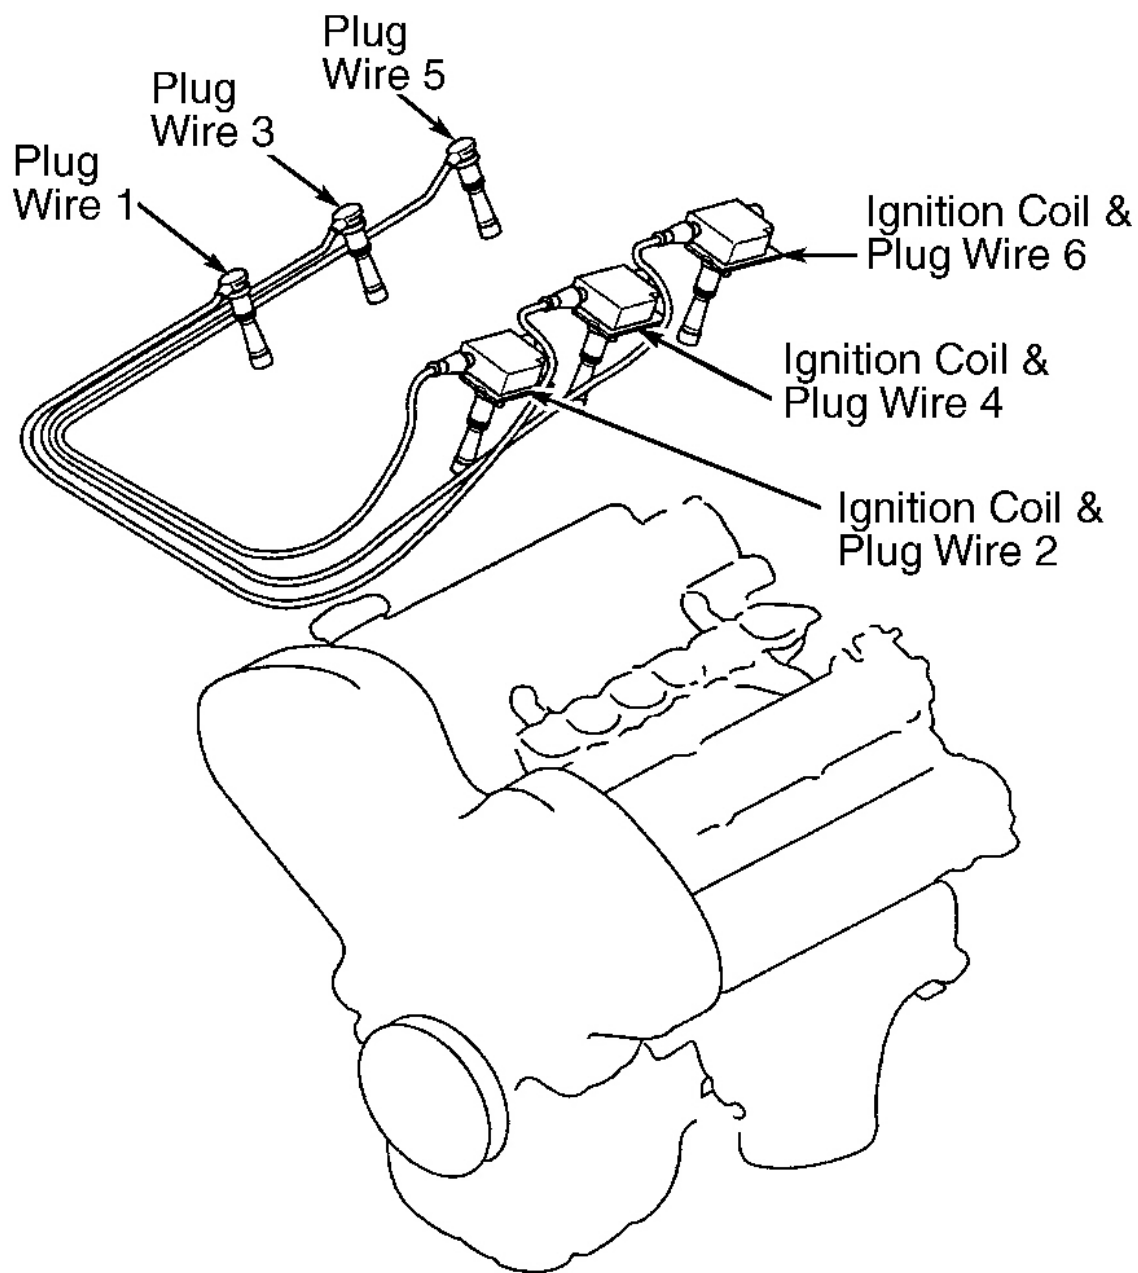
Identifying & Locating Plug Wires & Ignition Coils (Optima 2.7L)
